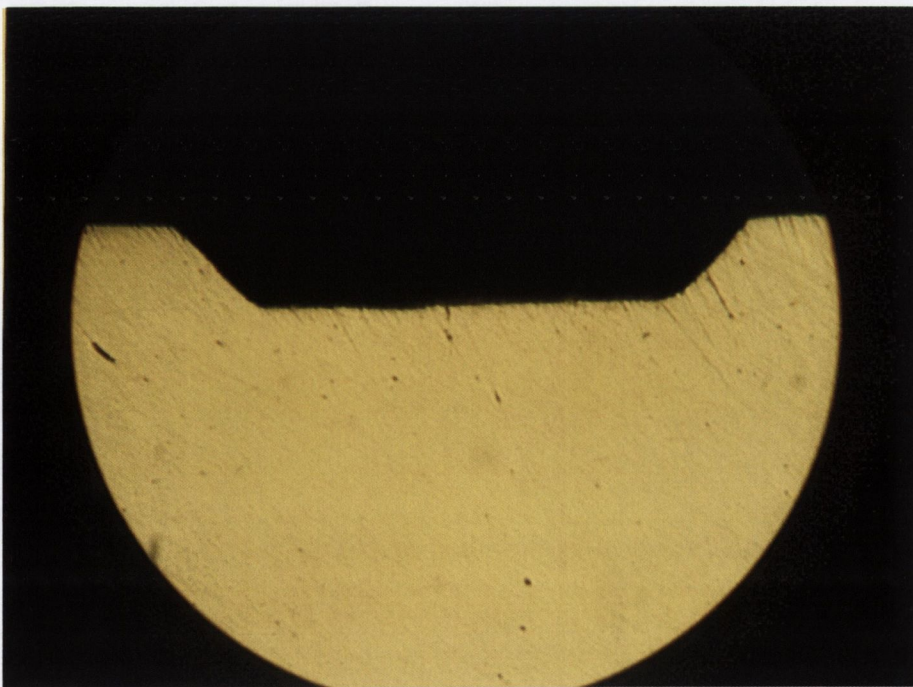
Picture of a cross-section of the first groove from a finished Form Rolled workpiece. (x50)
